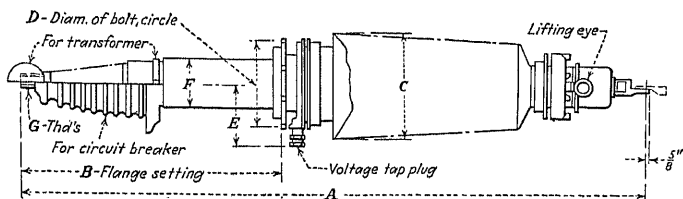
Condenser bushing for 220-kv. oil circuit breaker, Westinghouse Company.
